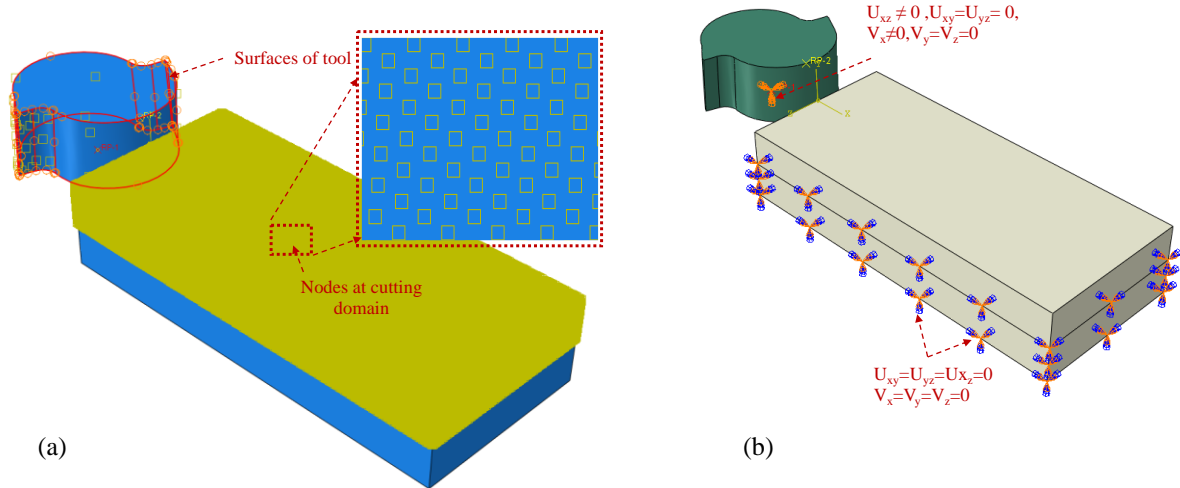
3D-FE model of micro-milling; (a) Surface to node milling; (b) Boundary conditions on workpiece and cutting tool
